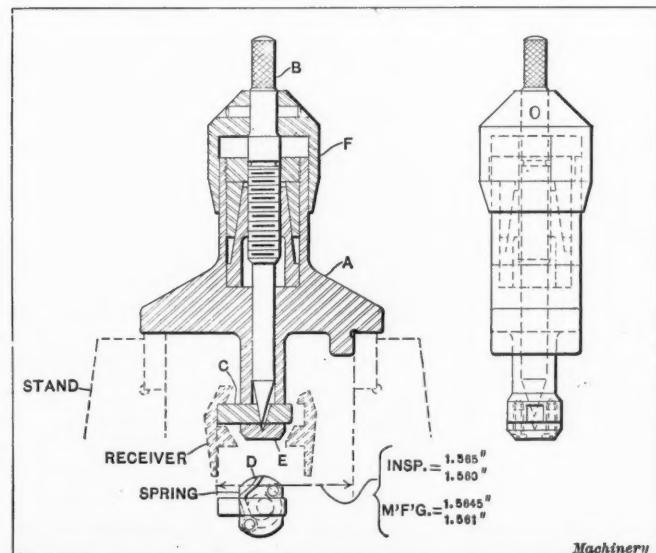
Micrometer Gage for testing Location of Bolt Guide Groove in Military Rifle Receiver
